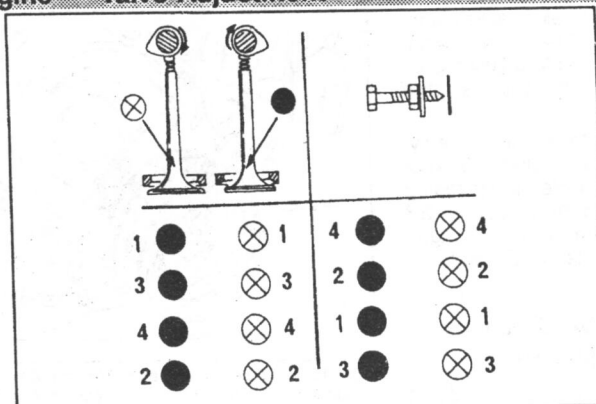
Adjusting the valve clearances when the valves shown on the L.H. side are fully closed. Adjust both valves of the cylinder shown on the R.H. side. Note the positions of the cams.
